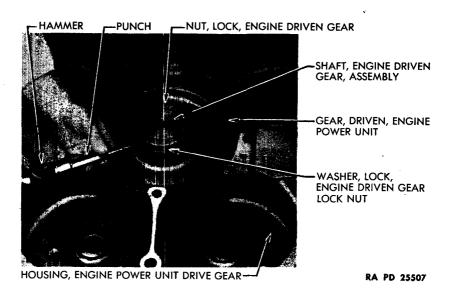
Bending Tabs: Of Engine Driven Gear Lock Nut Lock Washer
